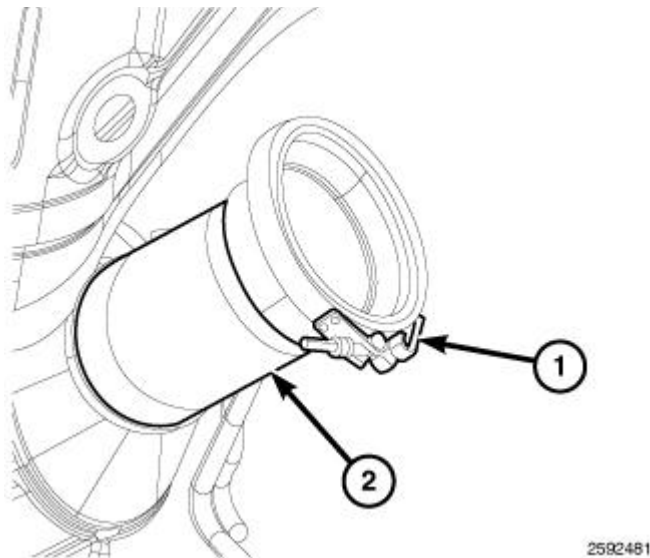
Turbocharger Exhaust Outlet V-clamp
